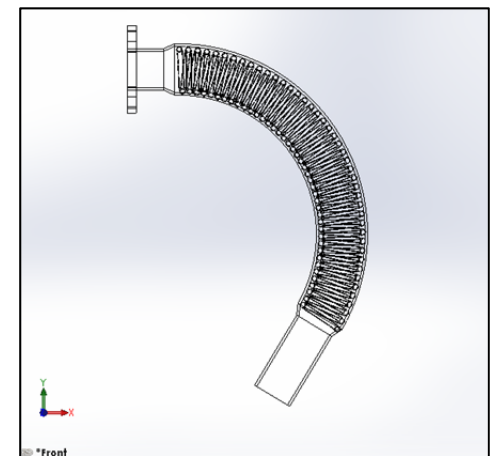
Wireframe view (front) of the heat exchanger along with the exhaust flange and the tail exhaust.
